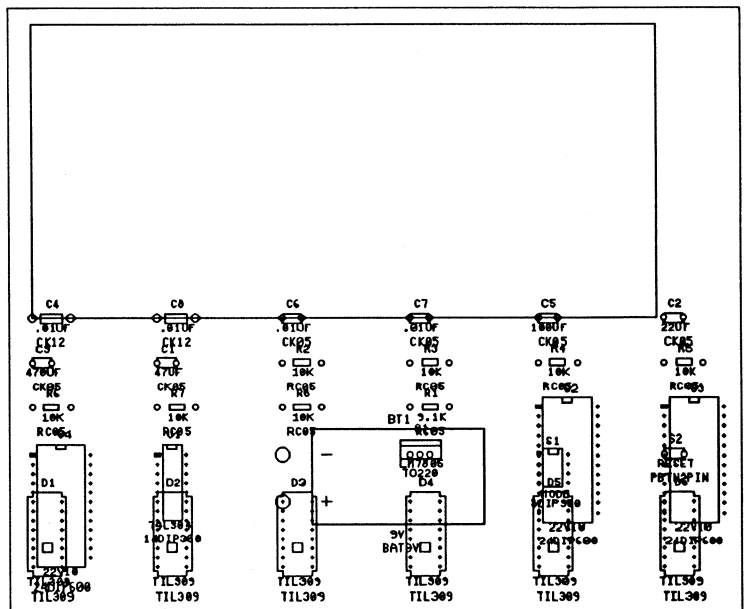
The TUTOR board, after loading TUTOR386.NET.
